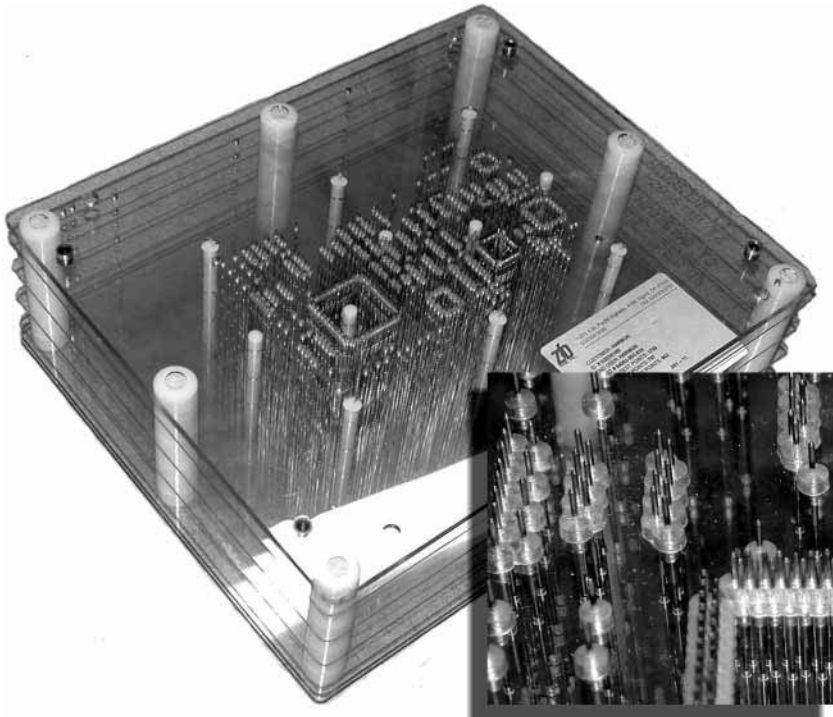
Example of a dedicated bed-of-nails test fixture. The insert shows a close-up view. (Photo courtesy of Zero Defects, Santa Clara, California.)
